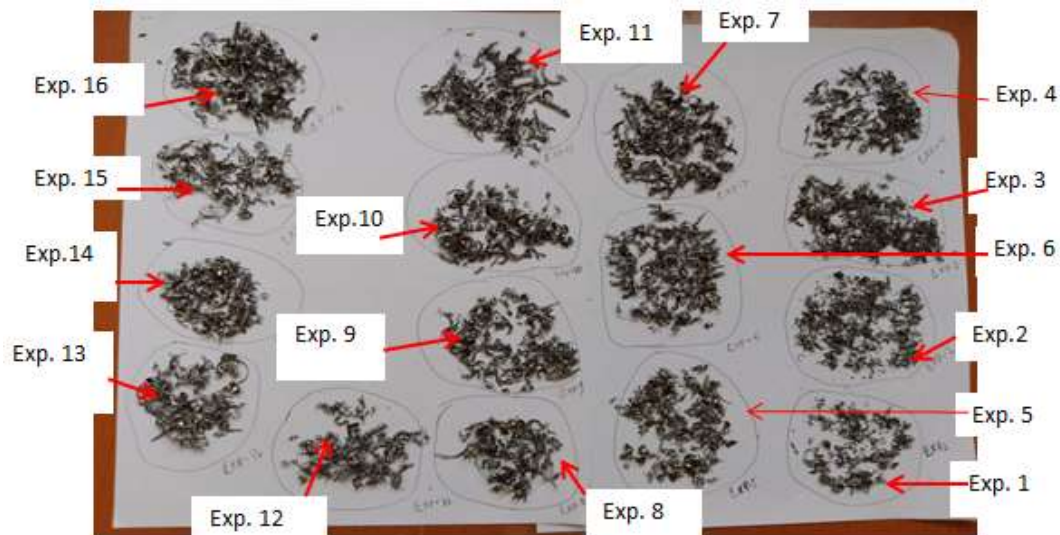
45 Chip Morphology Generated from Machined workpiece
